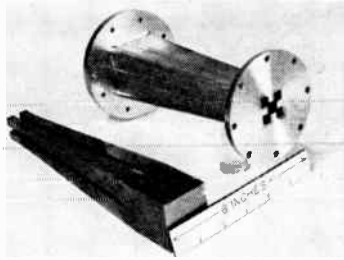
Waveguide is built using a combination of electroforming and machining techniques
